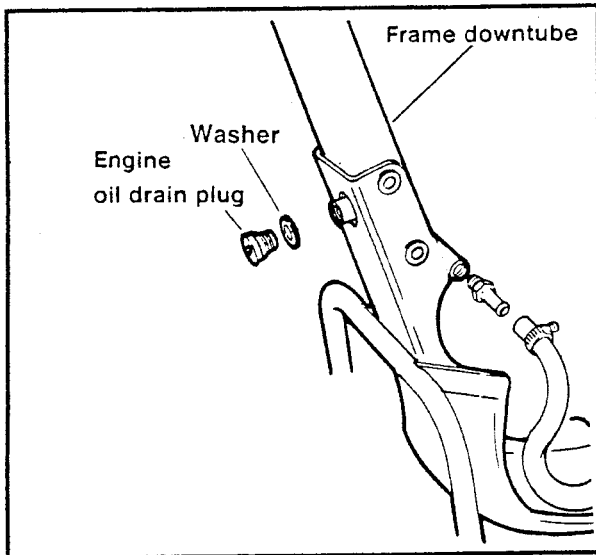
Front Frame Drain Plug and Engine Oil Strainer
